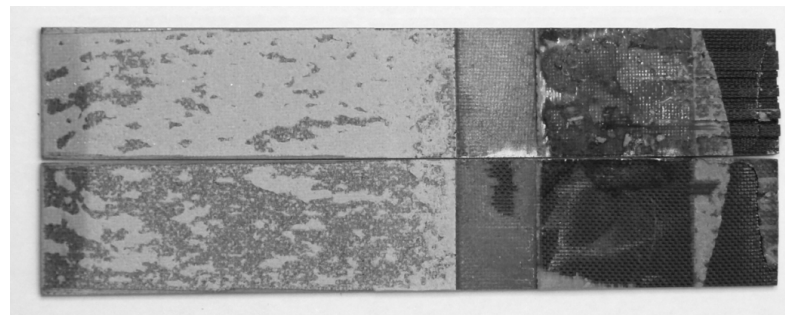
Fracture surface of a DCB specimen.
